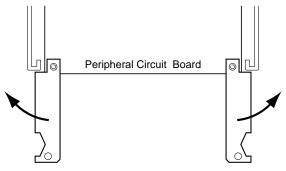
Dismounting the Peripheral Circuit Board
